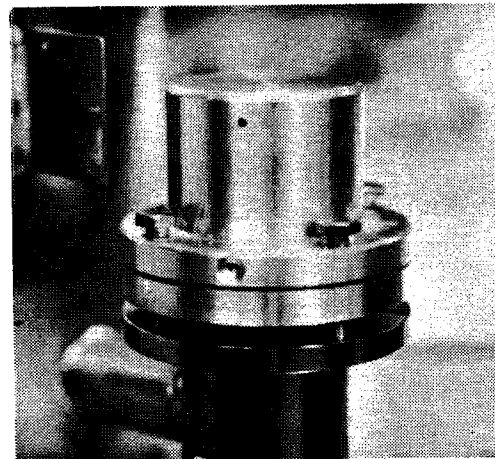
Pneumatic Actuator (Ready for Bolt Tightening—Note Gap)
